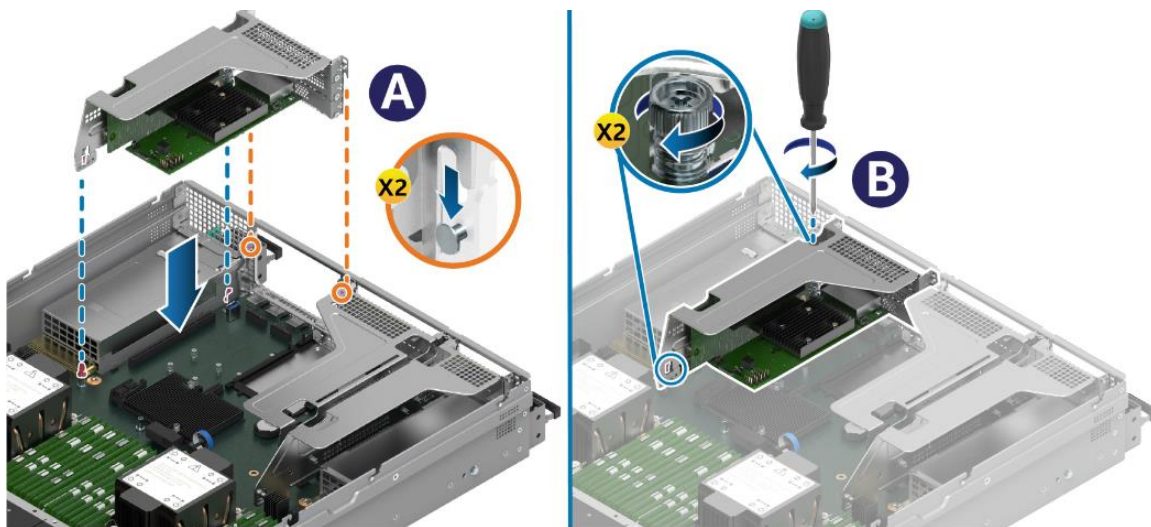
Intel® Storage Adapter Installation (Riser Card Assembly Installation)
